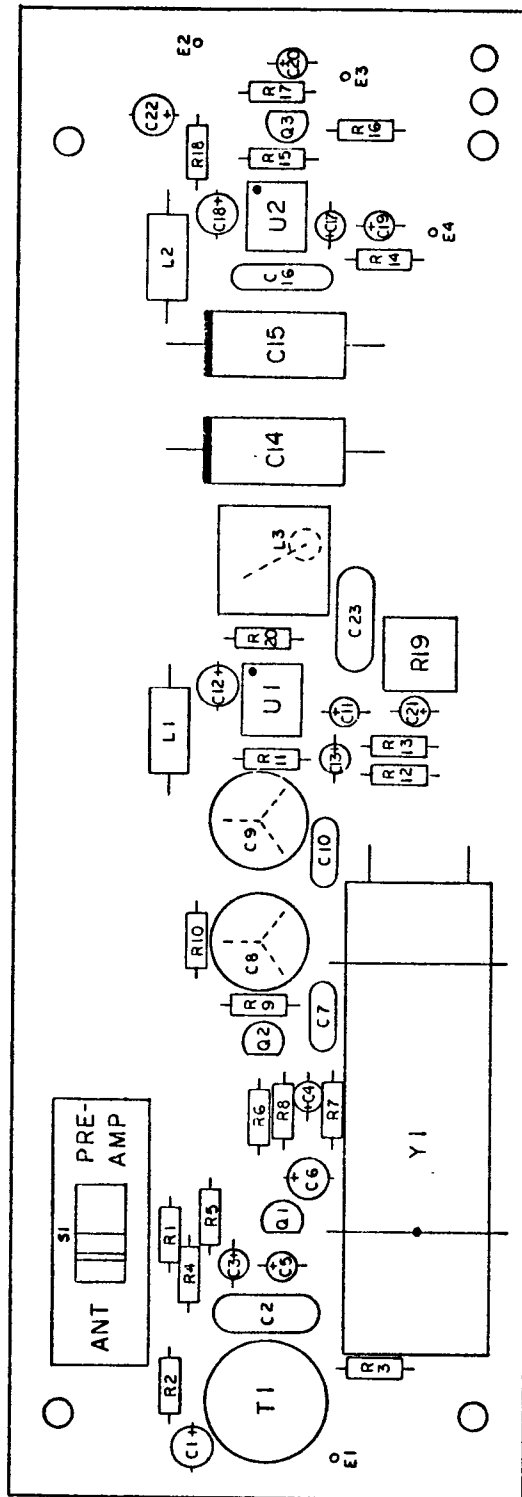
A1 RF AMPLIFIER ASSEMBLY
